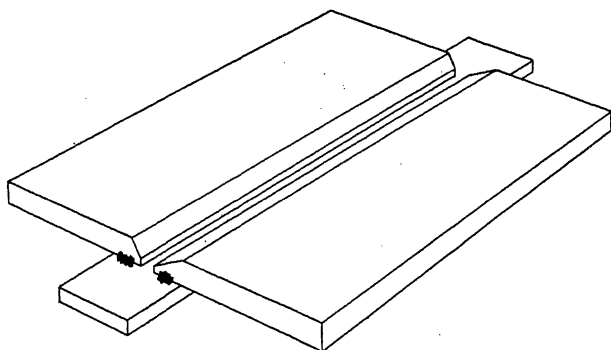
A butt weld with a backup strip tacked in position for welding
